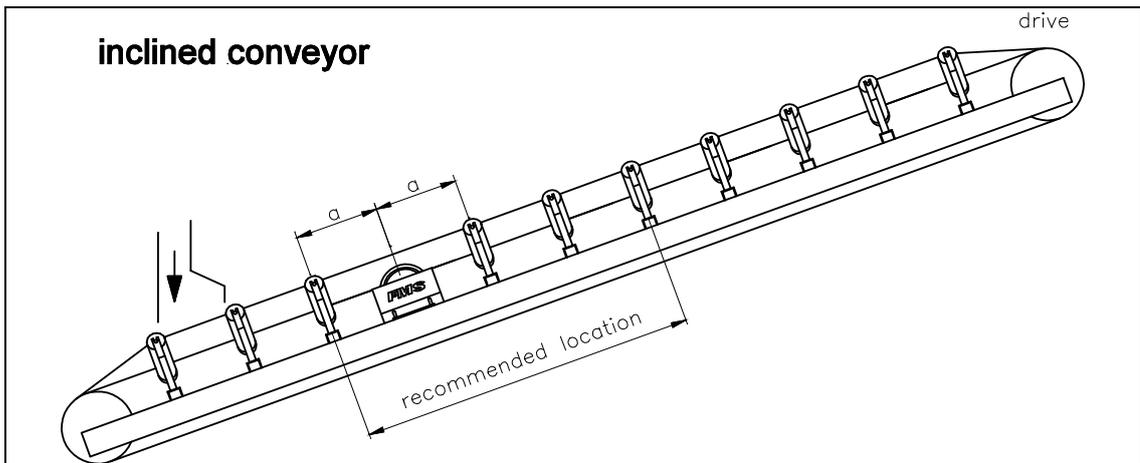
To minimize influences of the belt tension, the measuring roller should be located as far away as possible from the drive roller. B600002e
